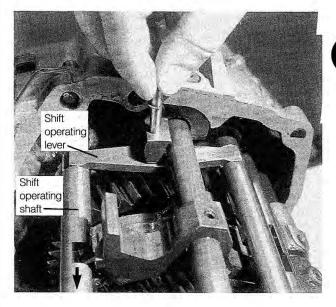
Shift operating lever locking pin being removed. Slide out shaft in direction of arrow.
